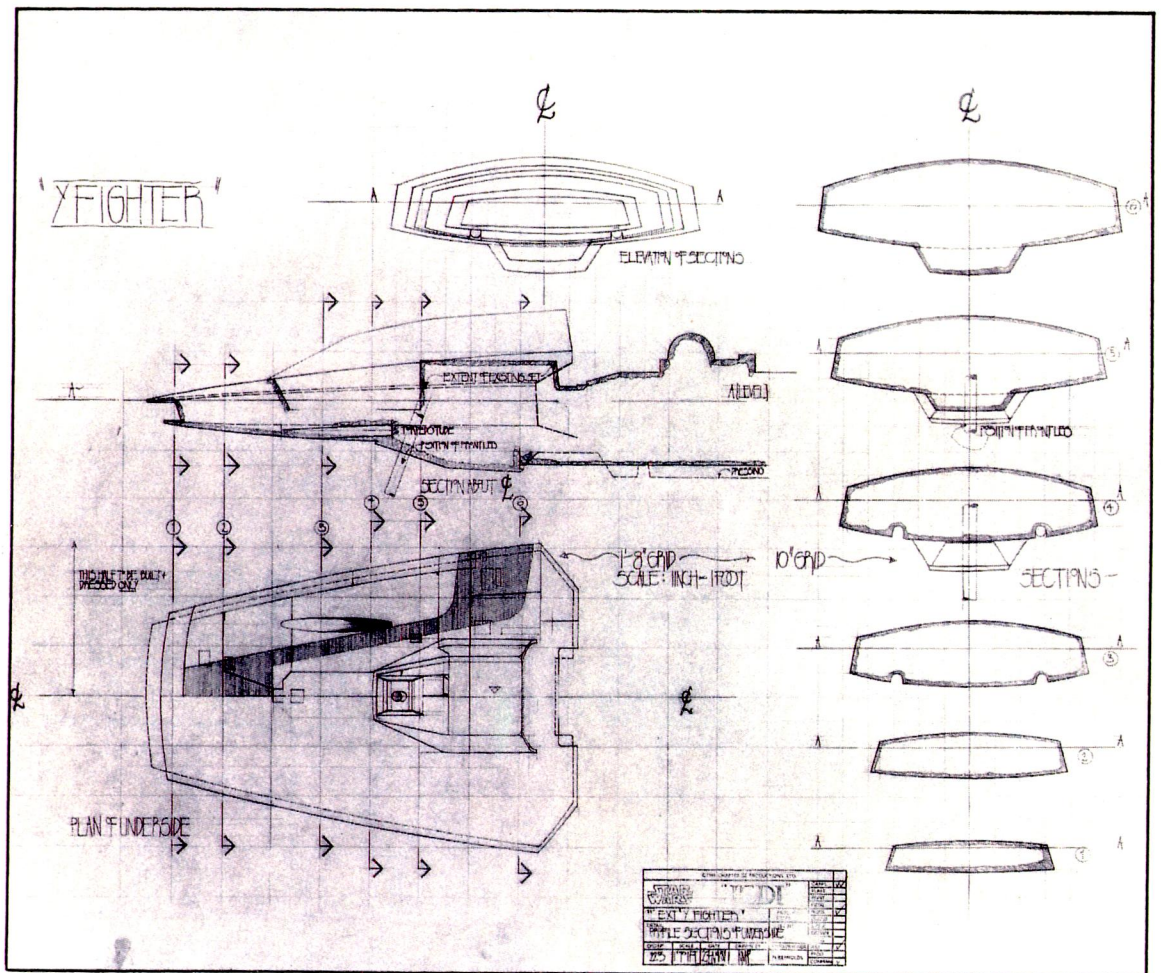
Technical drawing for the Y-Wing Fighter cockpit. From *Return of the Jedi*.
